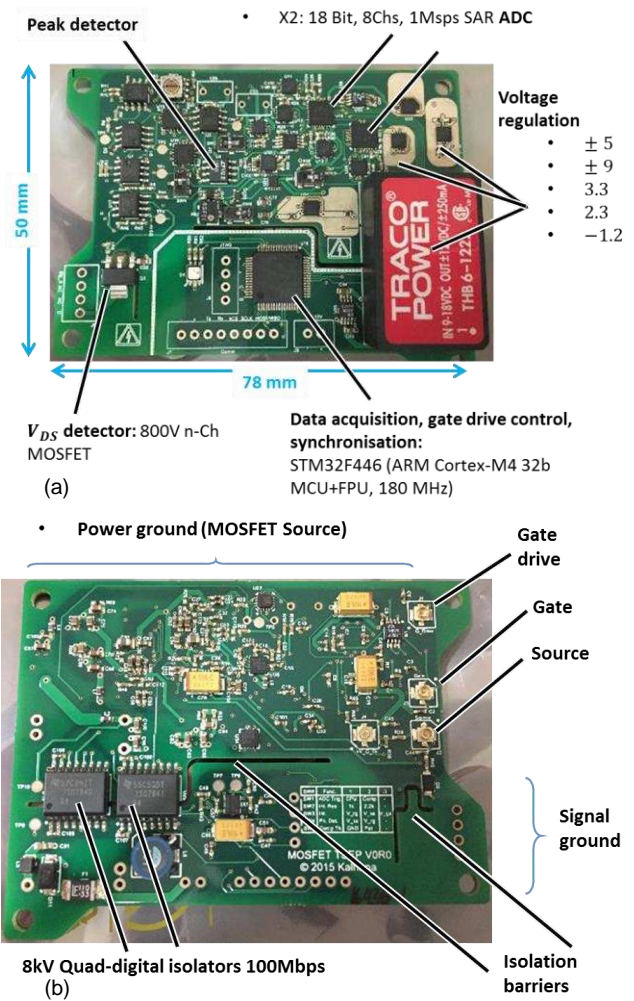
Top (a) and bottom (b) side of the acquisition board
